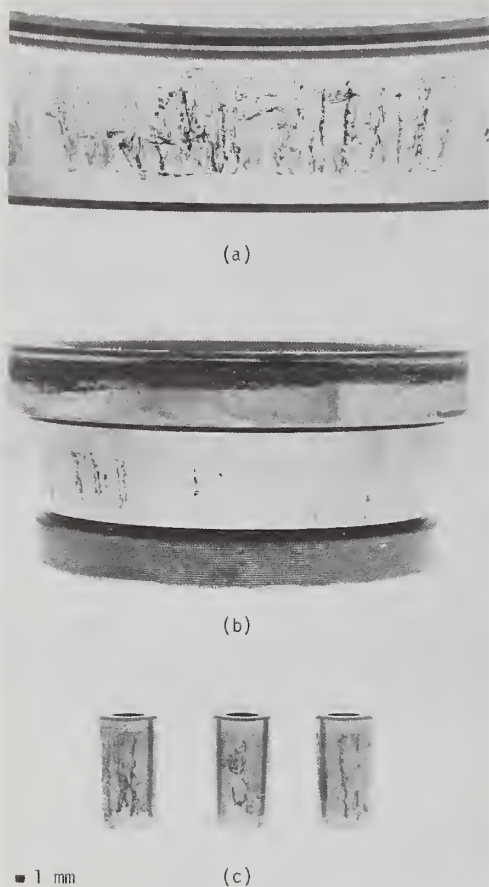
Corrosion or "water etch" caused by excessive water in the lubricant that entered the bearing through defective seals.
